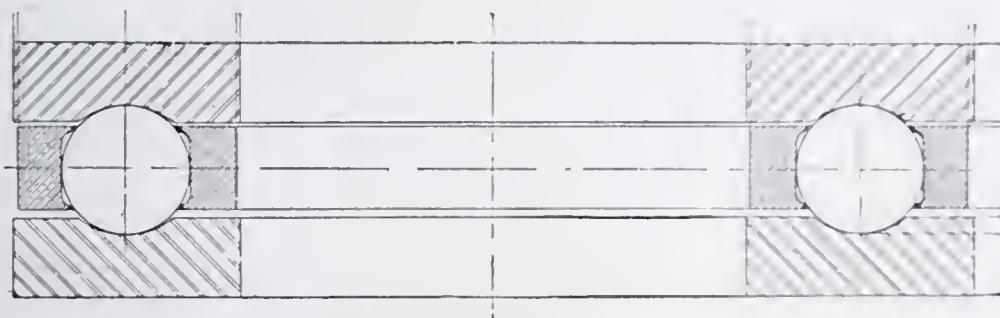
GROOVED BALL THRUST WITH CAGE OR SPACER.
